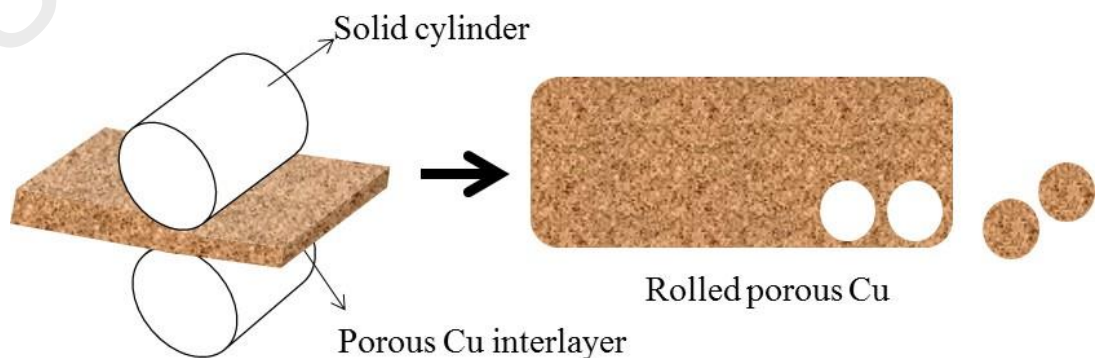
Schematic illustration of porous Cu rolling by using a solid cylinder
